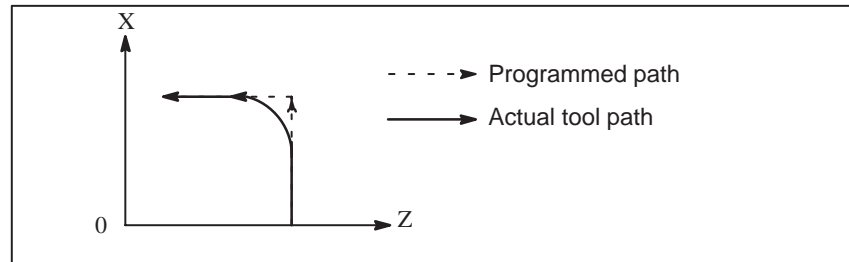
(b) Example of Tool Path between Two Blocks
